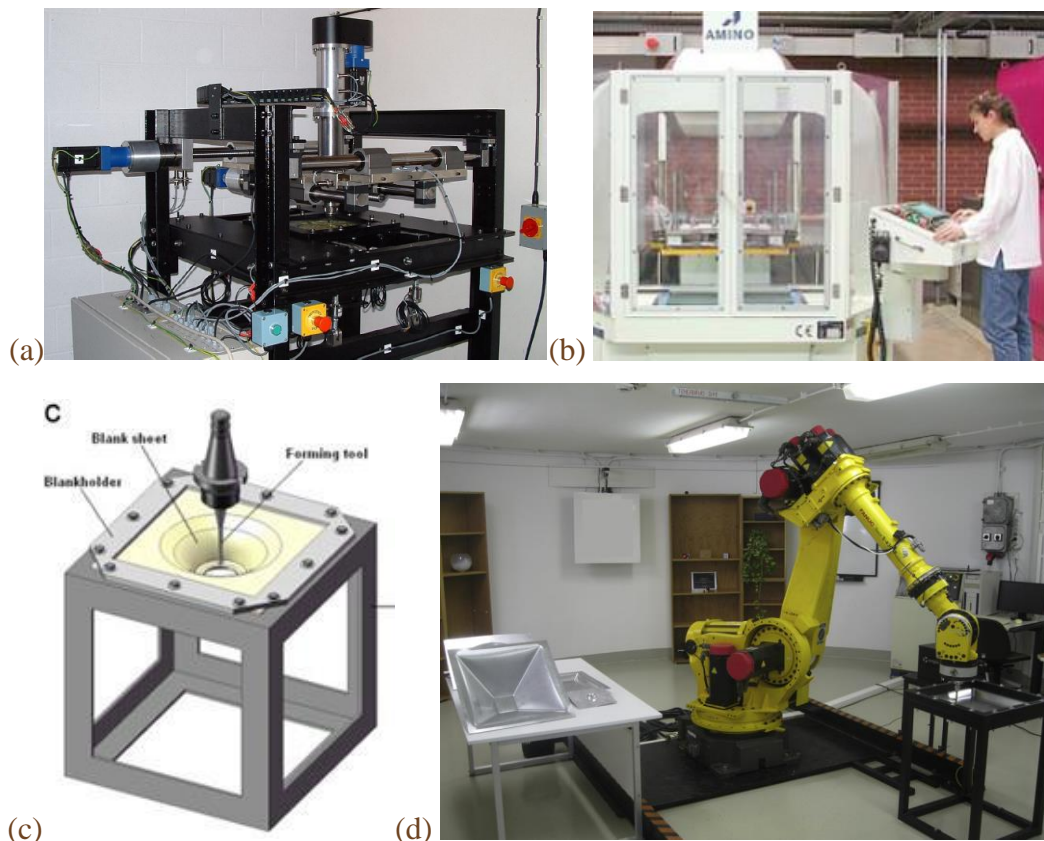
Fixture Design; (a) Purpose built [17], (b) purpose built AISF machine [106], (c) for CNC milling machine, [99], (d) Robots [105].
